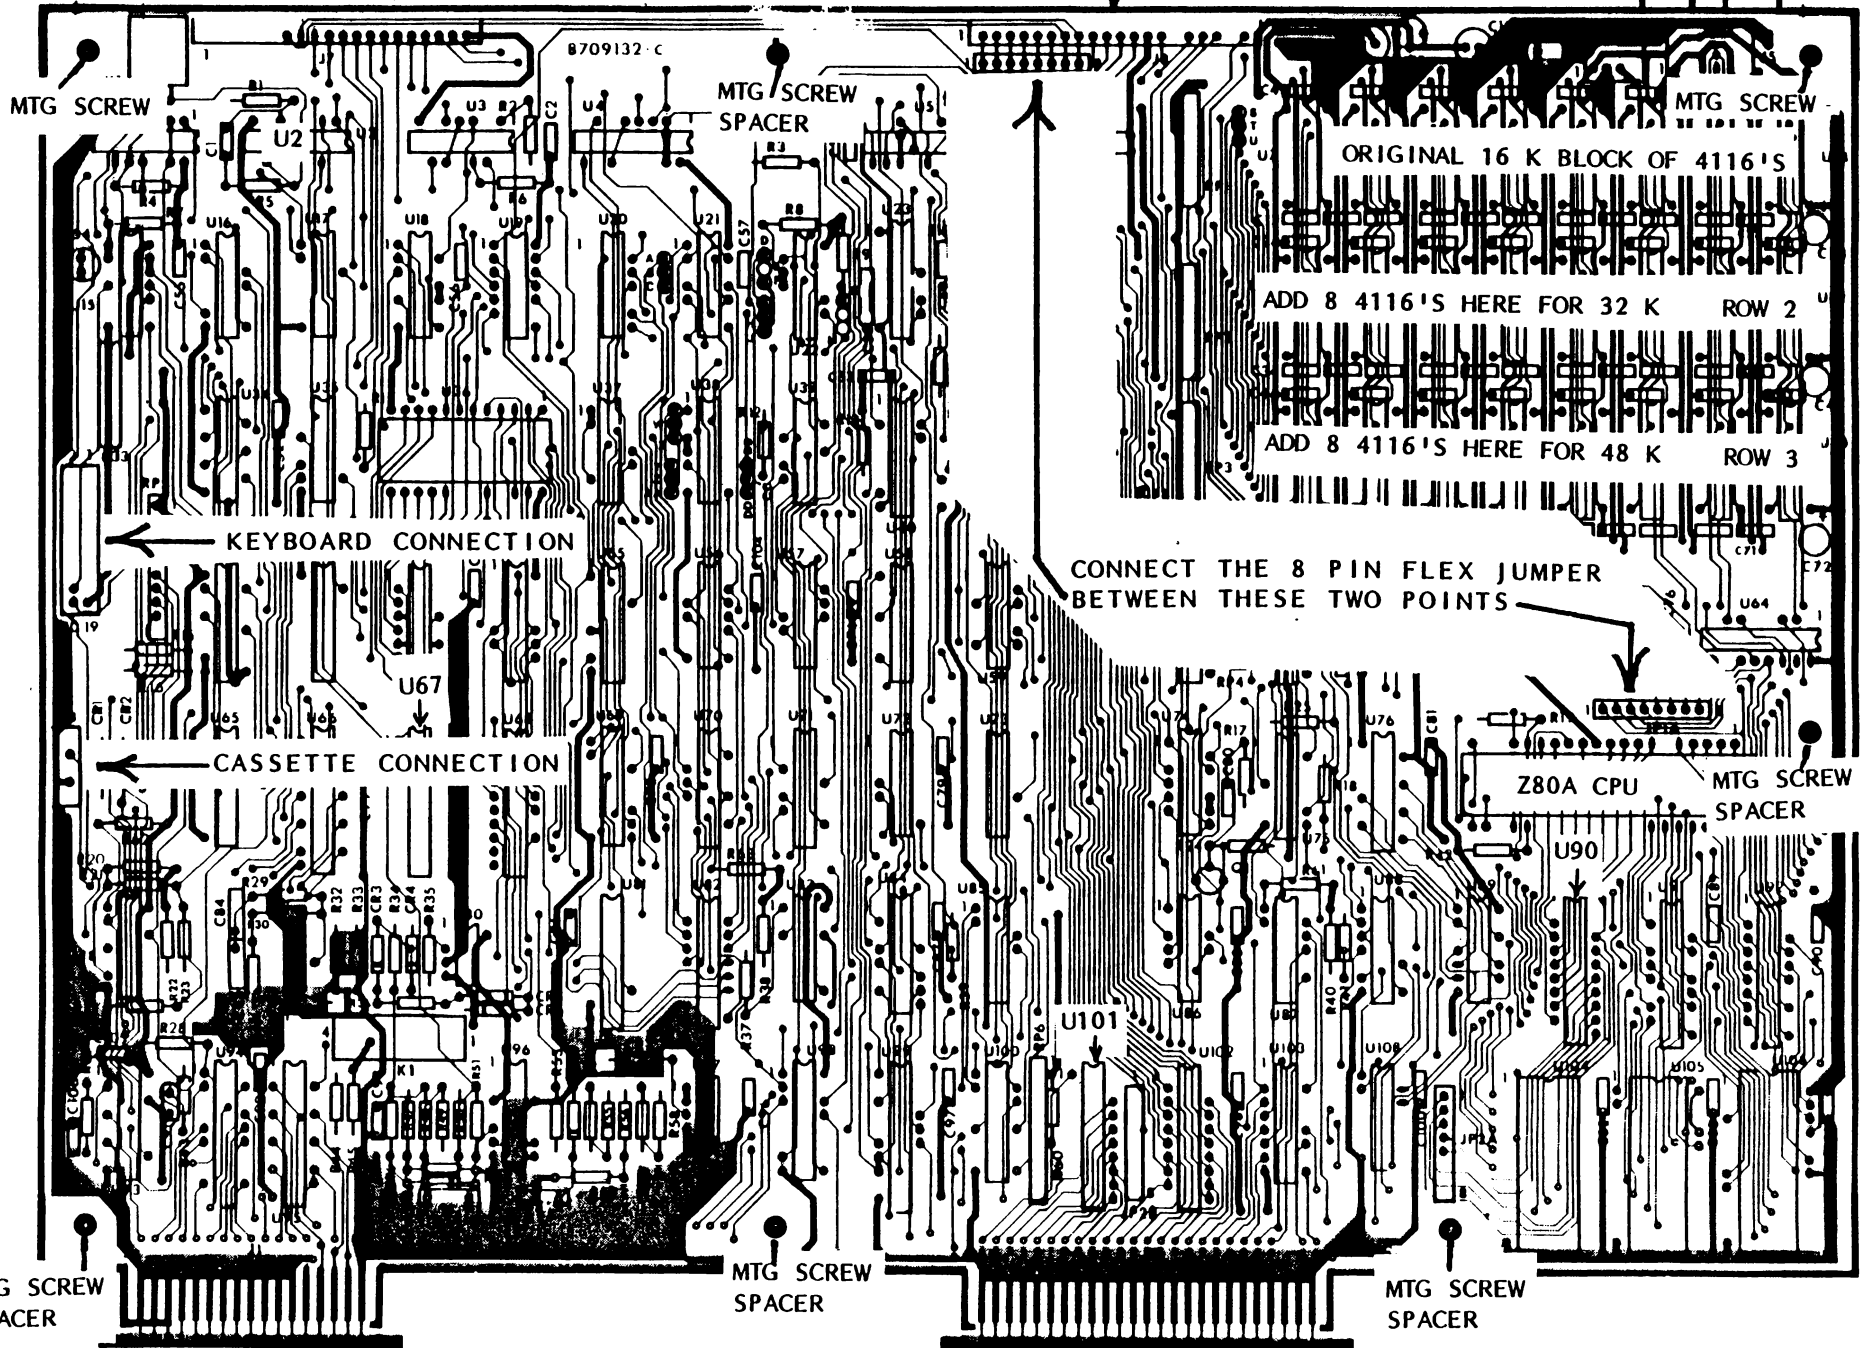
CPU PRINTED CIRCUIT BOARD
